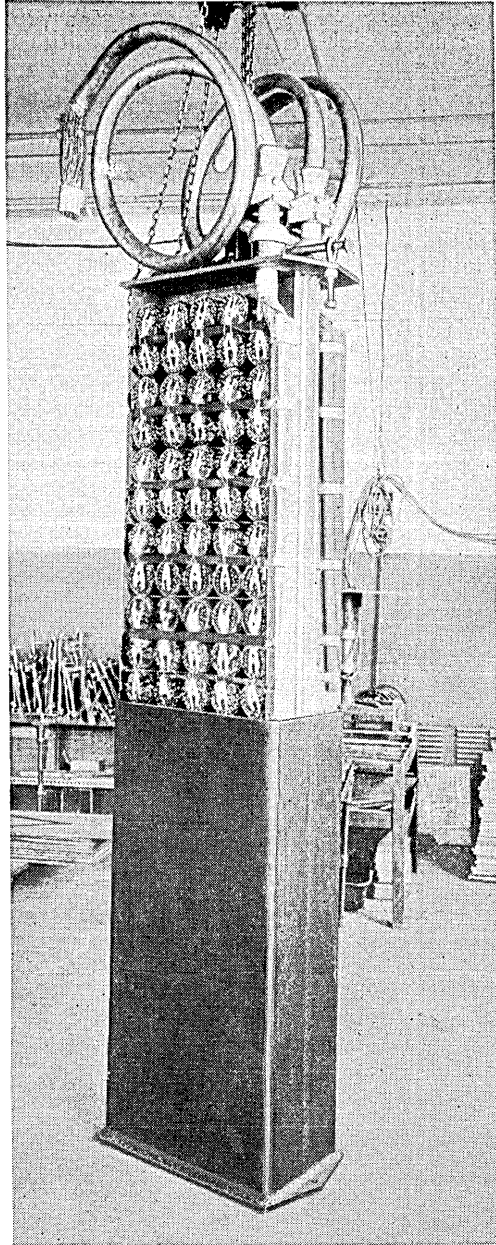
Potting assembly—108 P-B type loading units in large welded steel case. Assembly ready for lowering into casing. Half of loading units are on far side of assembly frame, not visible in picture. The large number of loading coils makes necessary the use of 2 stub cables.
